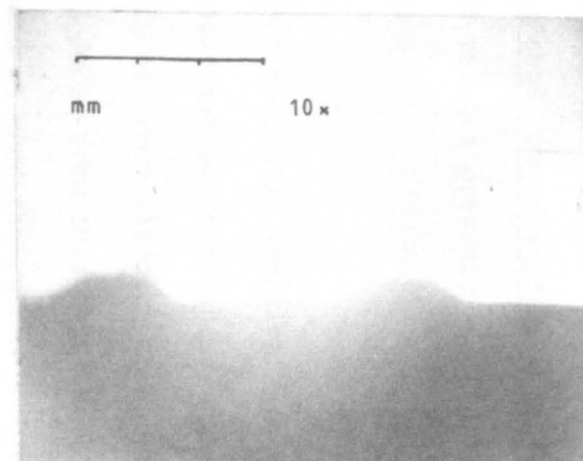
SPECIMEN 6D - INTERNAL CRACK,
